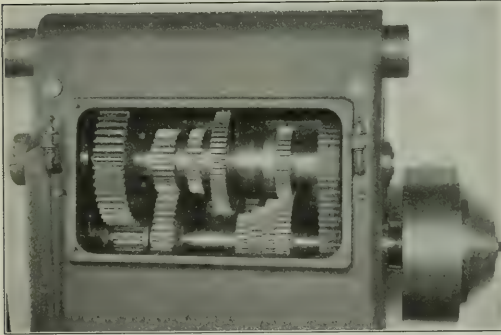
View Showing Driving Gears; Cincinnati Milling Machine.
